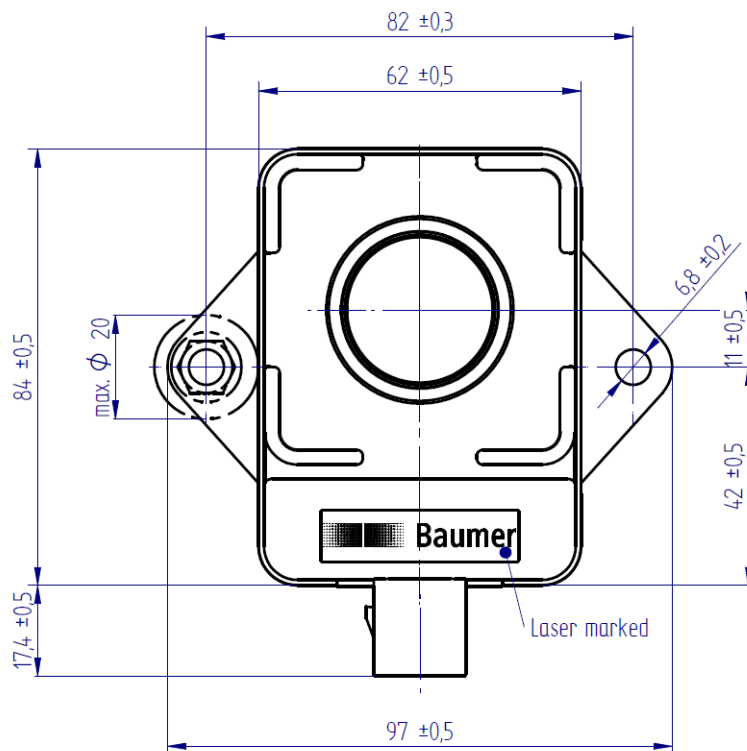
Mounting on thick soft steel plate ( $\geq 6\text{mm}$ ).
